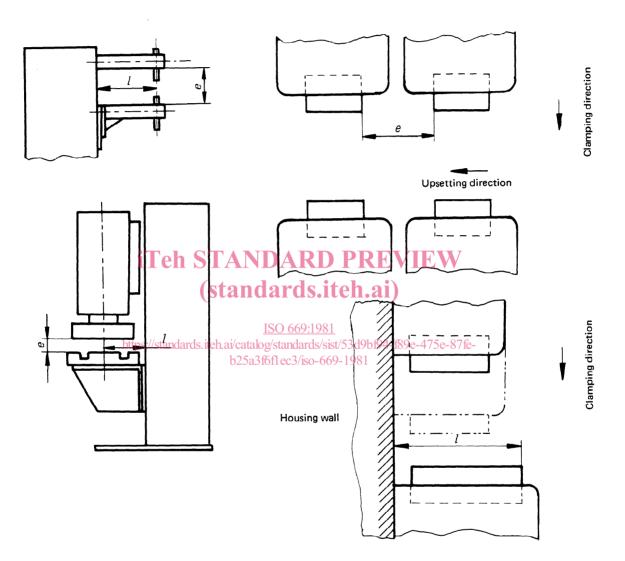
Geometrical characteristics of resistance welding equipment
